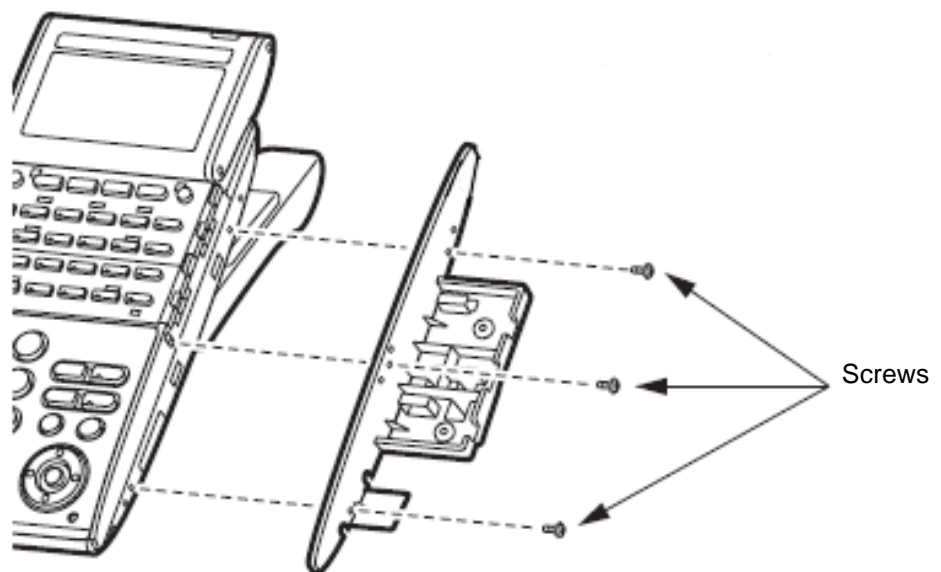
Secure Bracket to Multiline Terminal with Screws
